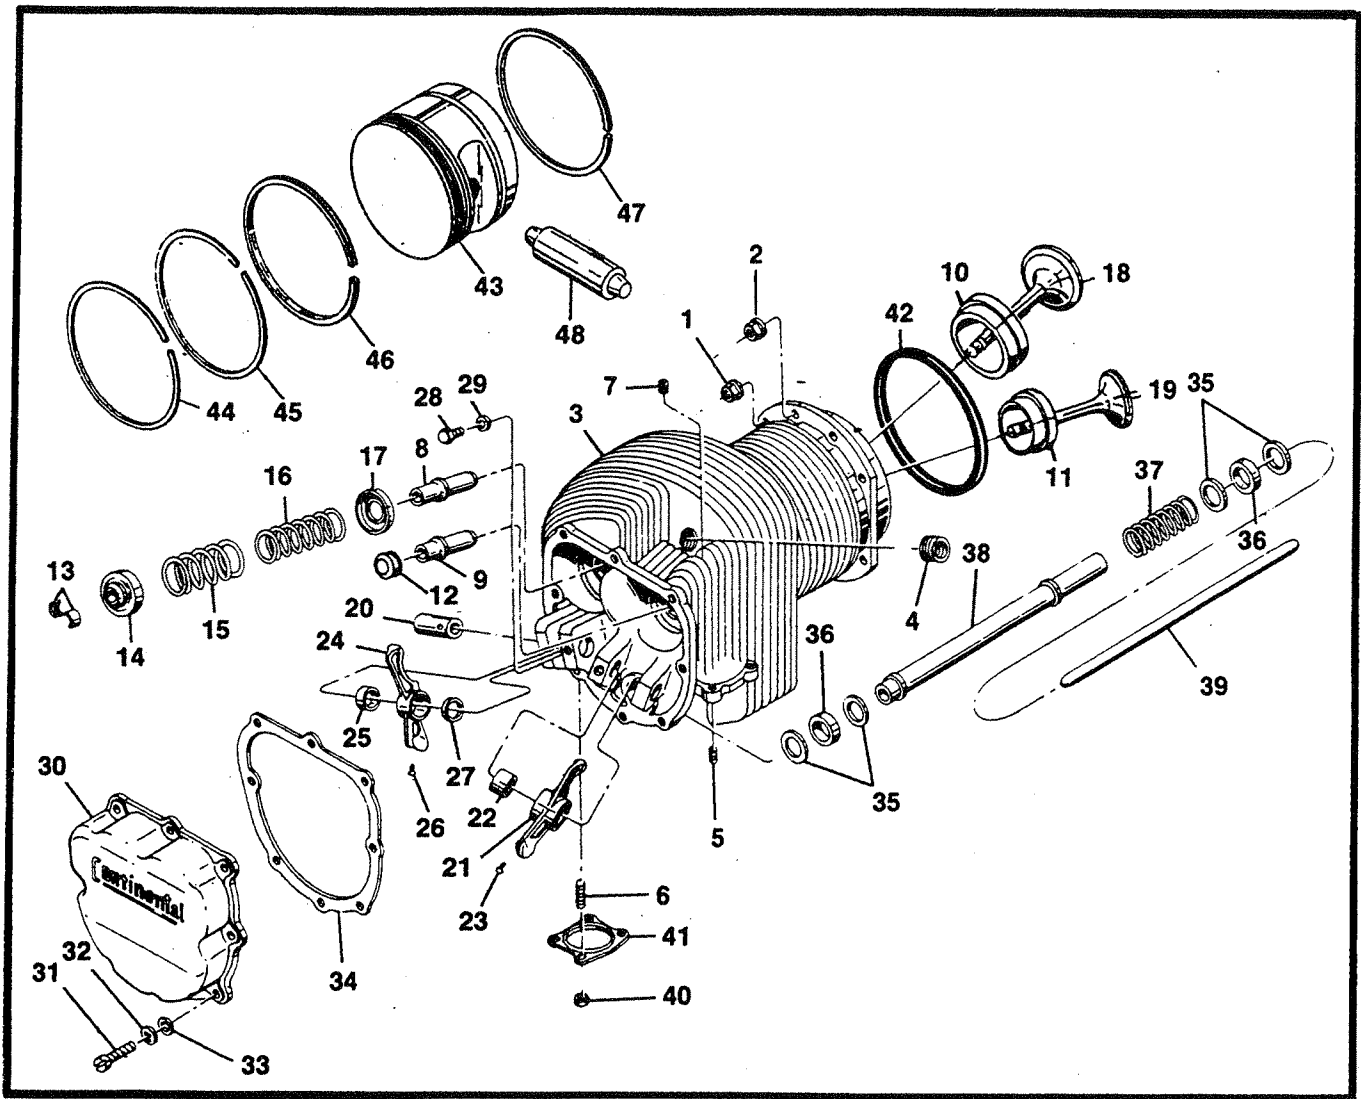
A. CYLINDER ASSEMBLY (INCLINED VALVE) ALL EXCEPT O-470-A,E, & J.
